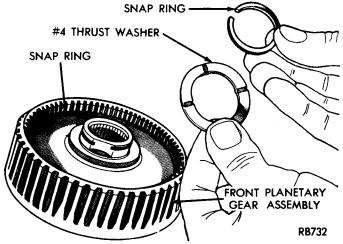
Remove or Install Front Planetary Gear Snap Ring and No. 4 Thrust Washer
